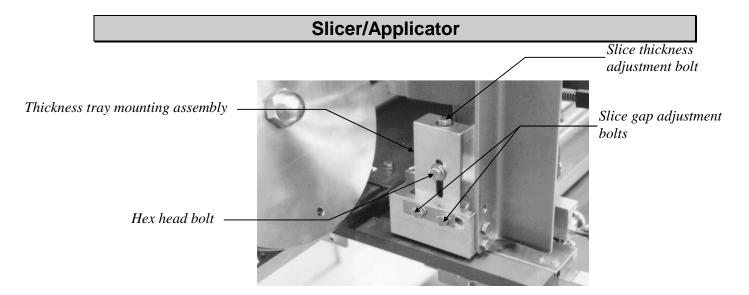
Slice Gap and Slice Thickness Adjustment Bolts - Hydraulic Machines
